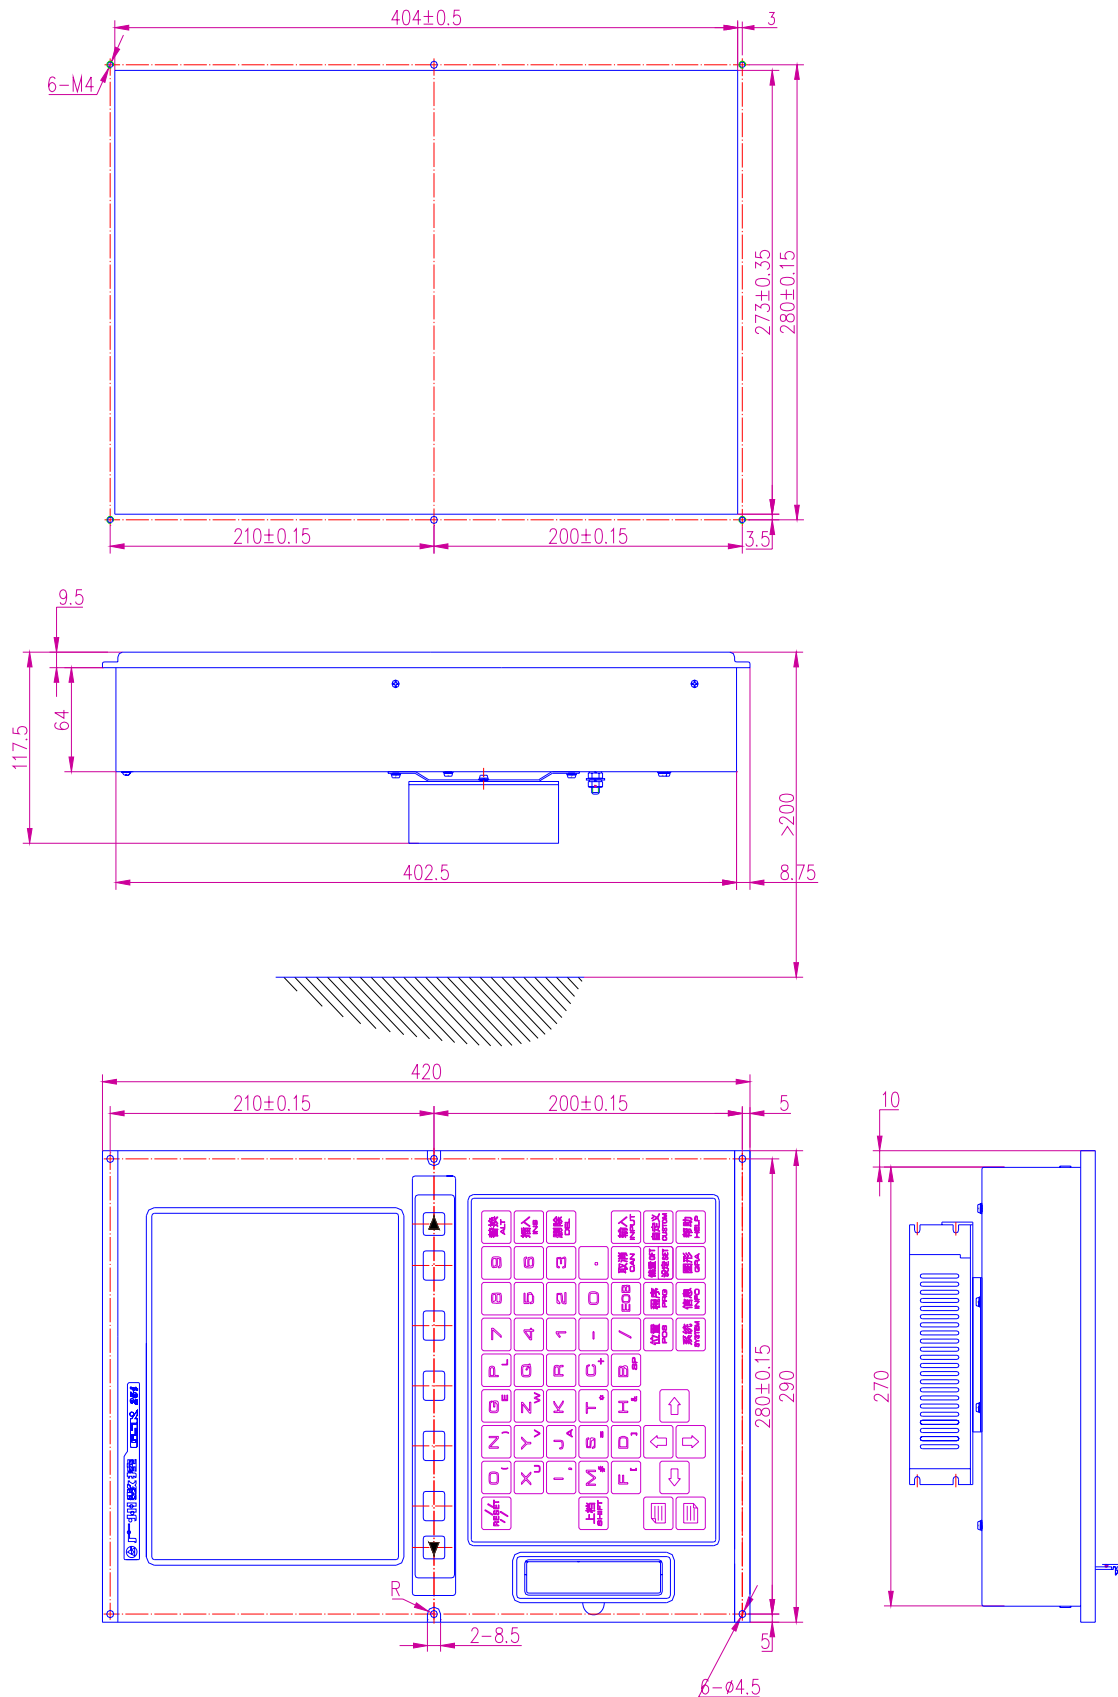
GSK 25i system box installation dimension (unit: mm)
